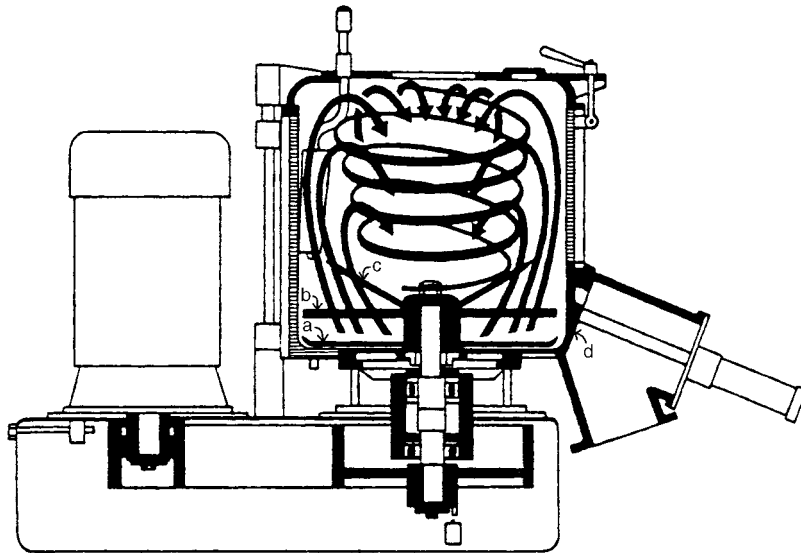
High-intensity mixer: (a) bottom scraper; (b) fluidizing tool; (c) horn tool; (d) flush-mounted discharge valve. (Henschel Mixers America, Inc.)
